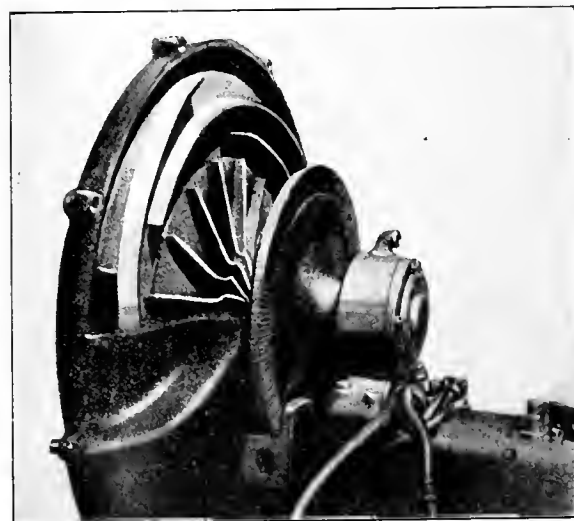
MOSS TURBINE WHEEL AND WATER-COOLED REAR BEARING
